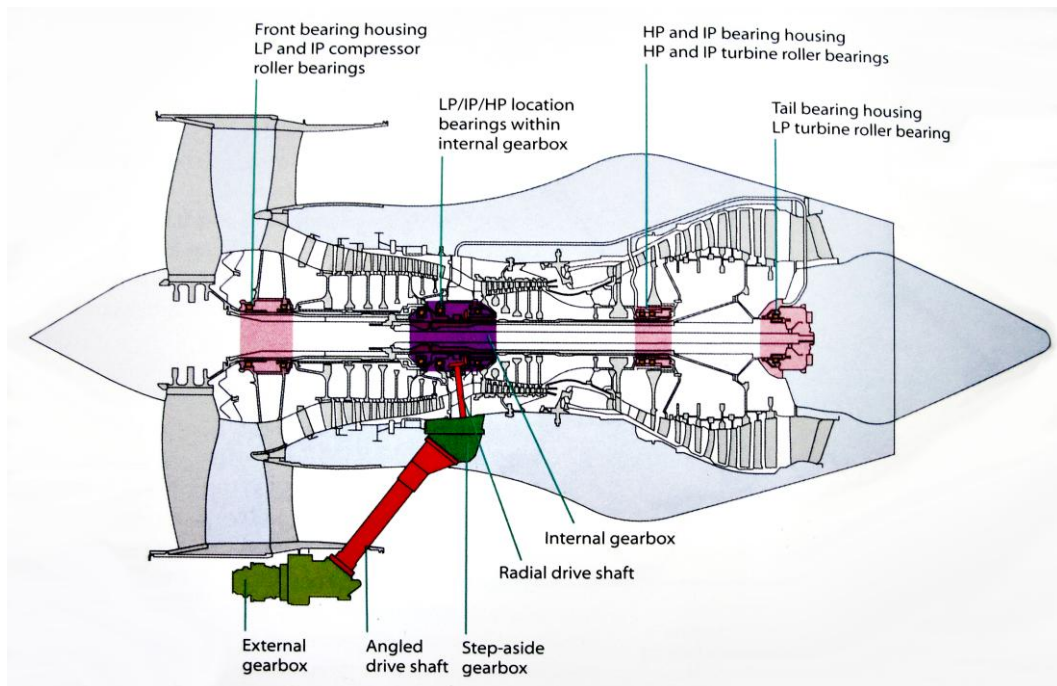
Typical transmissions arrangement in a jet engine.
